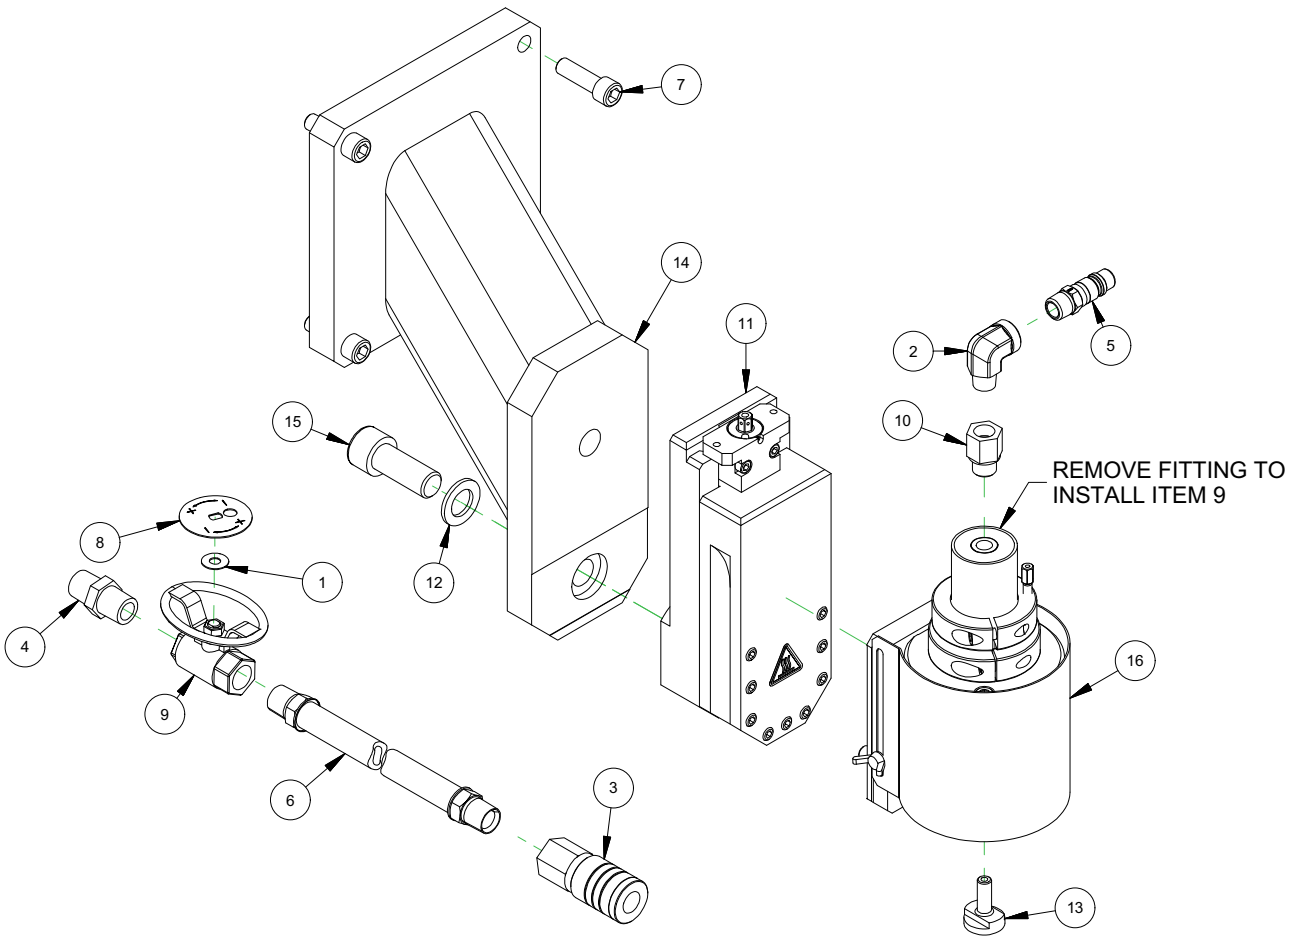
COUNTERWEIGHT ARM ASSEMBLY (P/N 62031)
